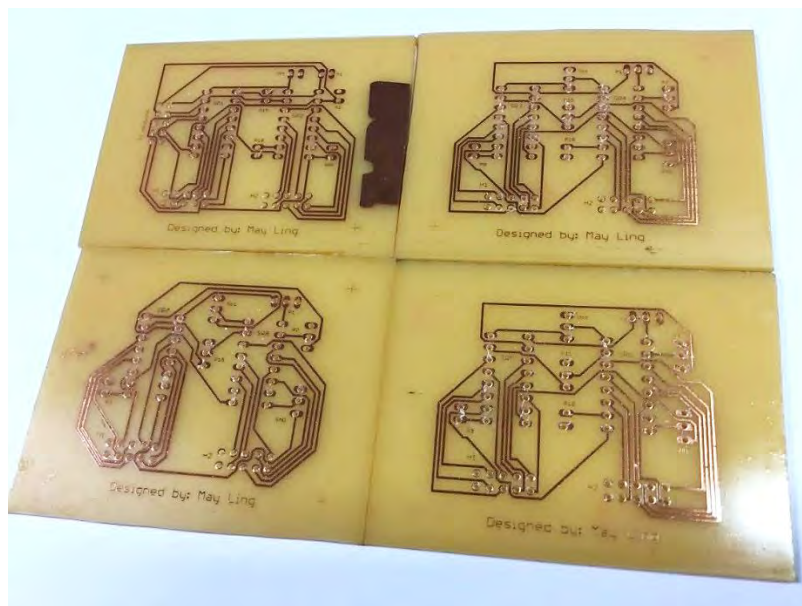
Etched and Drilled PCB Circuit of Shift Registers
